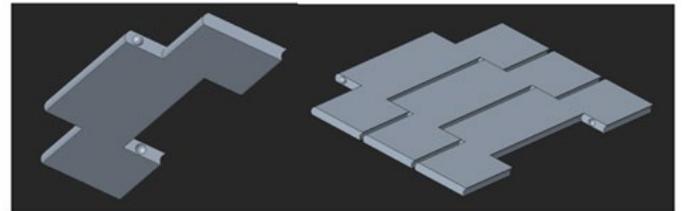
3D Rendered board; top side (left), bottom side (right)
